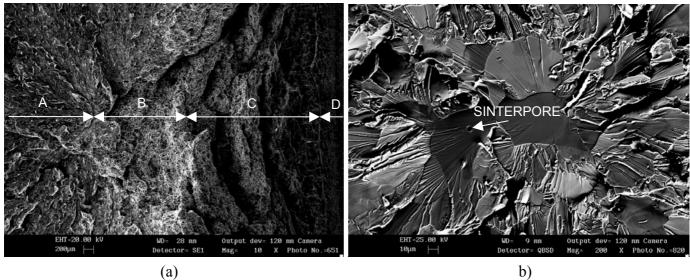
Fracture surfaces of (a) a J-integral sample tested at 485°C (A...final cleavage fracture, B...stable ductile crack growth, C...blunting zone, D...fatigue pre-crack) and (b) a bending sample tested at RT
